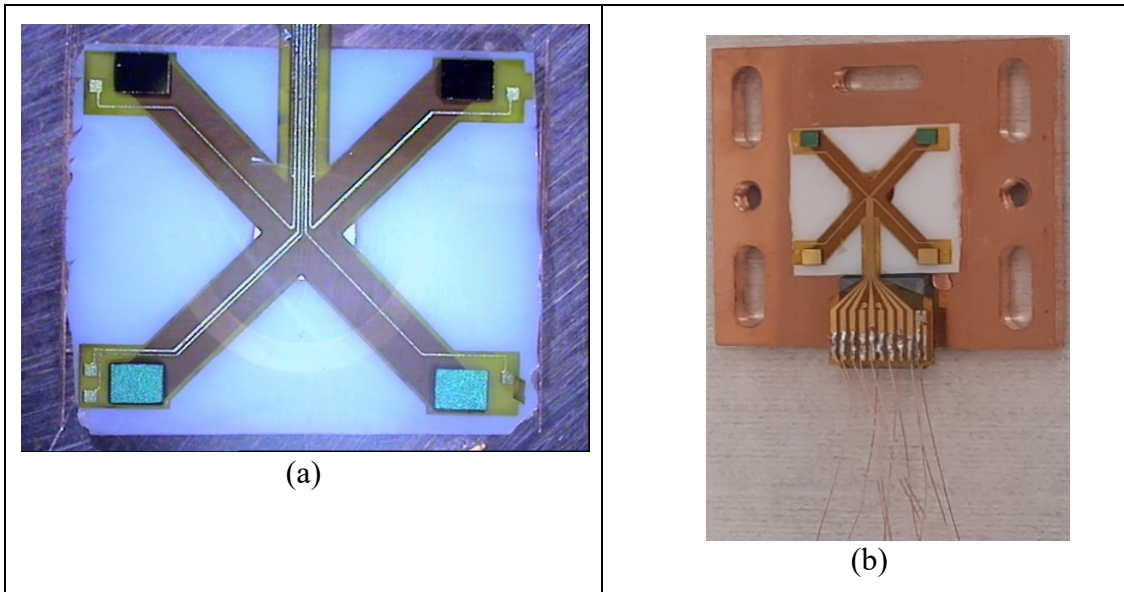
(a) Shows 4 diced pieces of wafer which had Au layer bonded on bottom PCB. (b) Shows completed bottom part of DMD.
